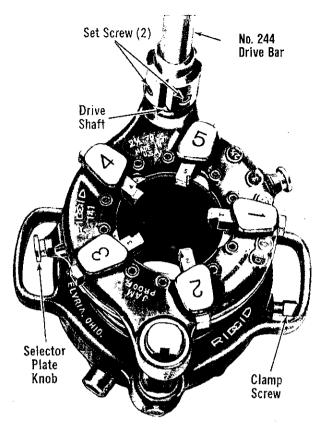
No. 141 Threader with No. 244 Drive Bar Installed (No. 4PJ Threader Similar).
